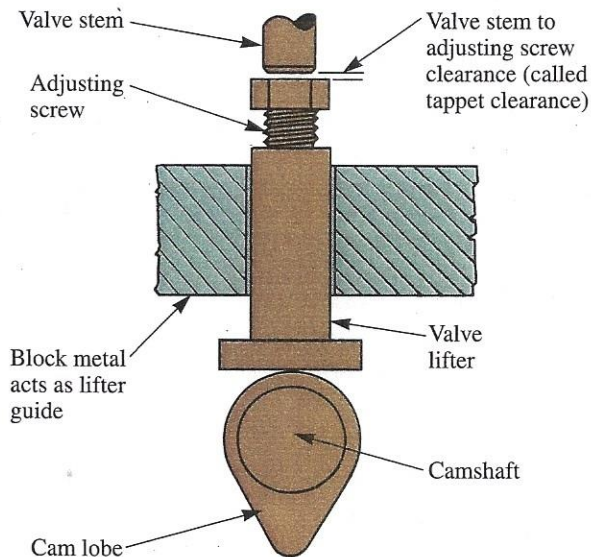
As camshaft turns, cam lobe will operate valve lifter to open valve, then allow it to close.
